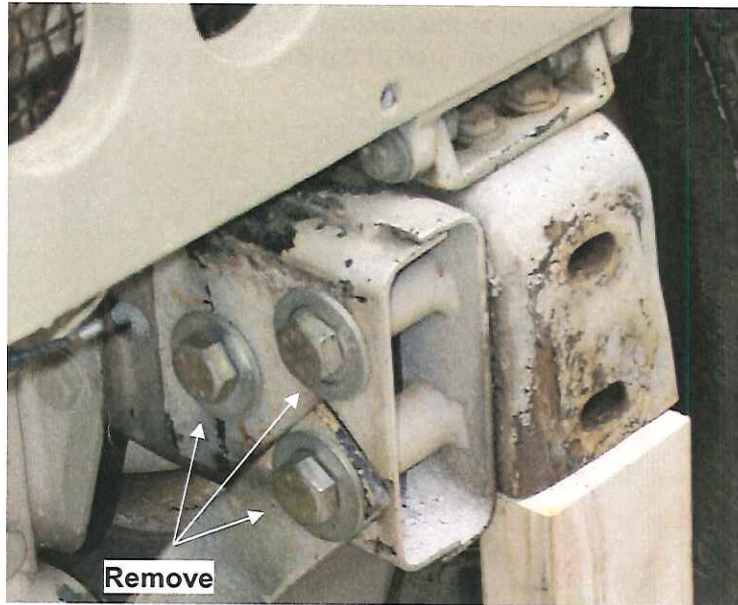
REMOVE EXISTING FRAME BOLTS
